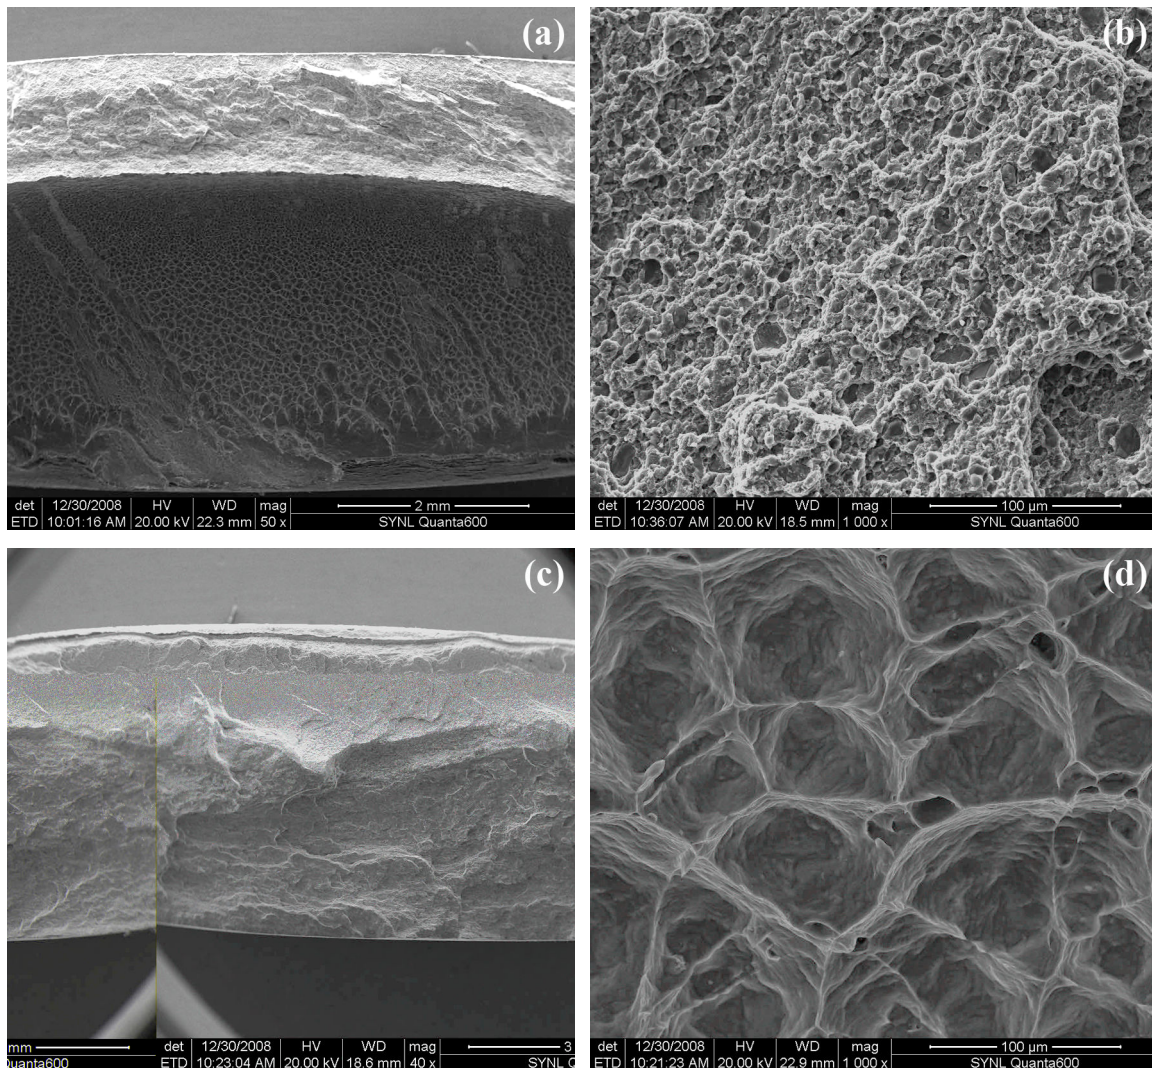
SEM image showing tensile fracture surfaces of FSW joint: (a), (b) NOS sample, (c), (d) OS sample.
